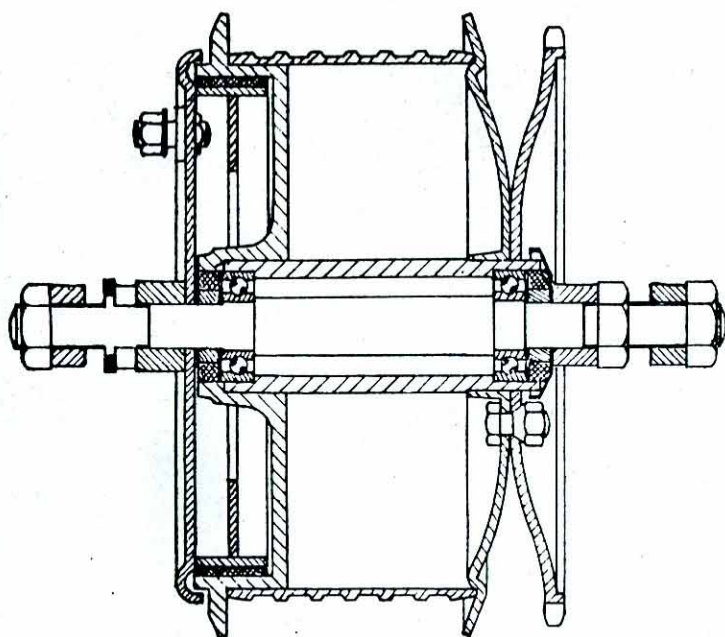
HUB WITH RIGID JOURNAL BEARINGS
